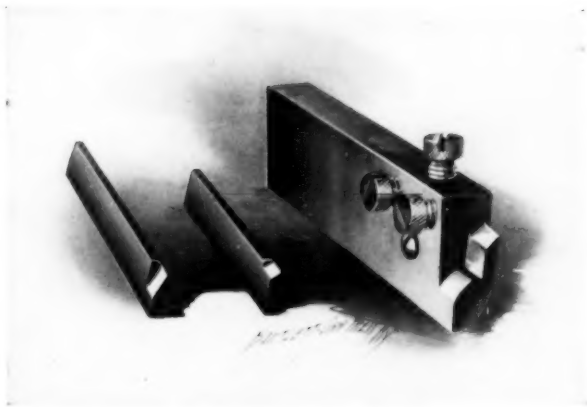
NO-CLEARANCE TOOL FOR STANDARD ENGINE LATHE TOOL POST, WITH
